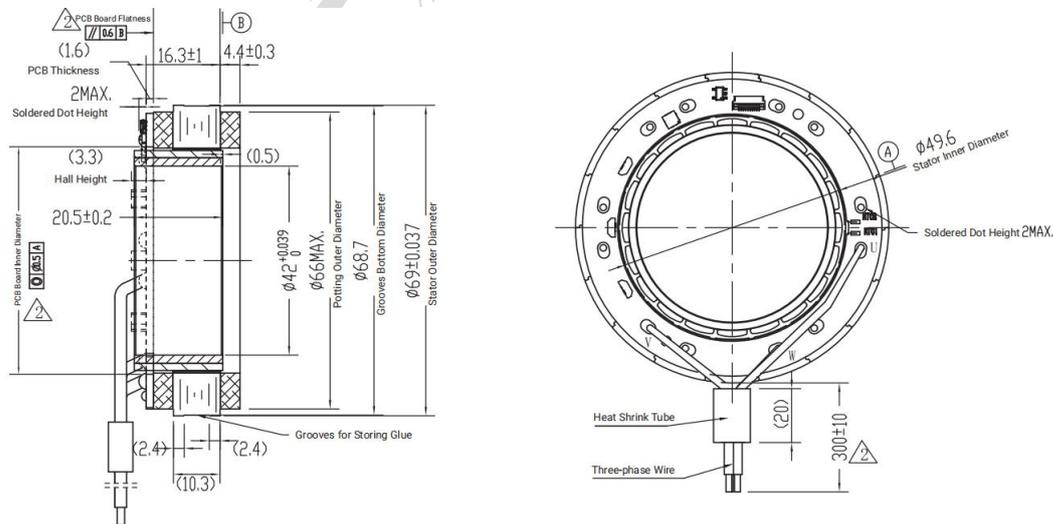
RMD-FL-70-10-200 appearance dimension drawing
